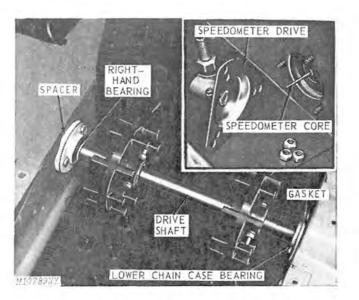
Removing Drive Shaft Bearing Flangette Bolts
